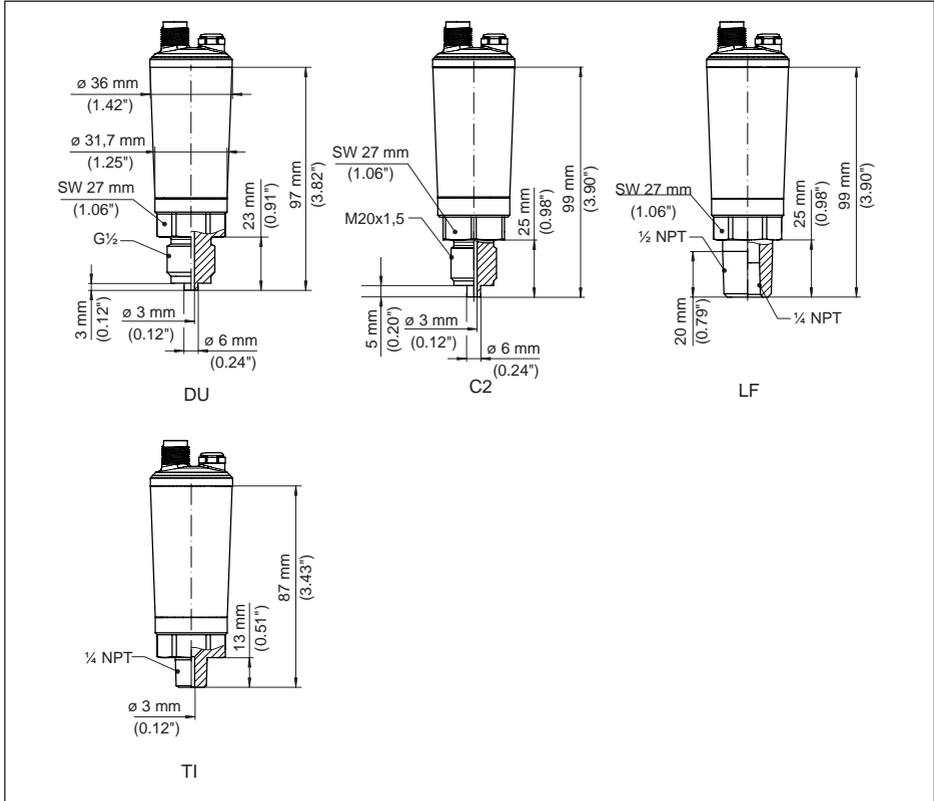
VEGABAR 29, threaded fitting not front-flush
